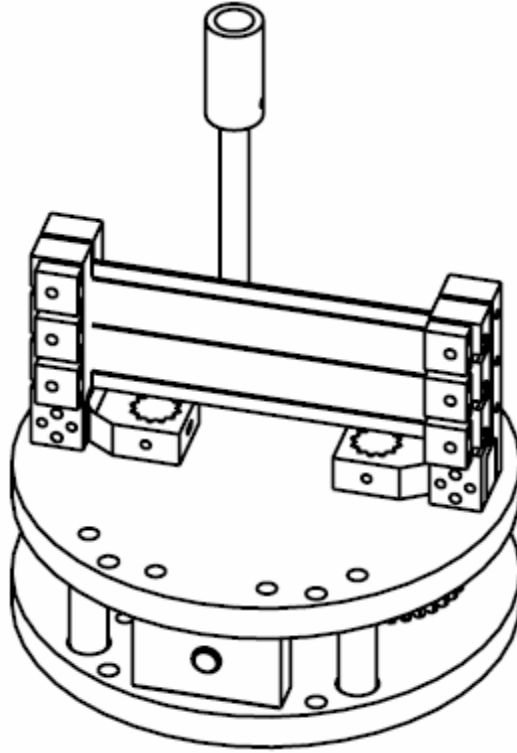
Wire frame image of the pure bending mechanism [1].
